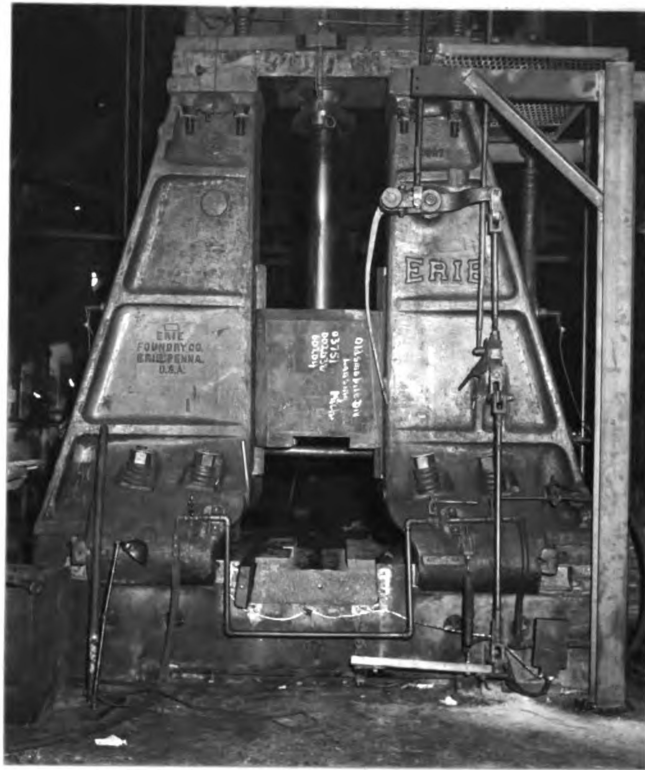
Five-thousand-pound forging hammer with sow-block and key installed.
